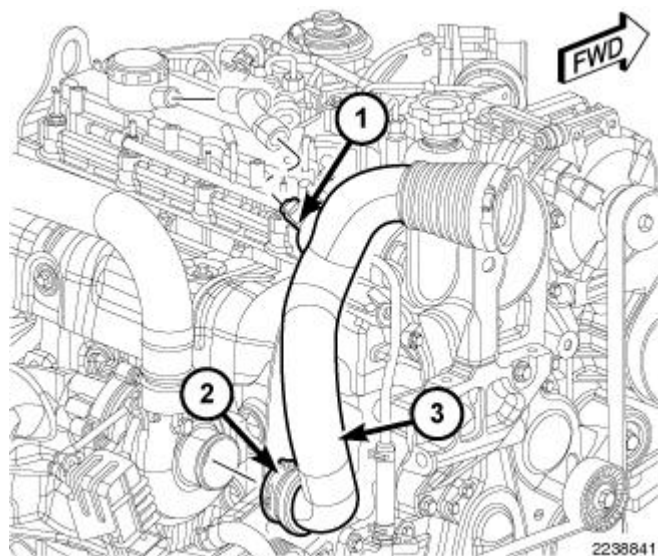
Crankcase Vent Hose Heater Electrical Connector & Turbocharger Inlet Tube
